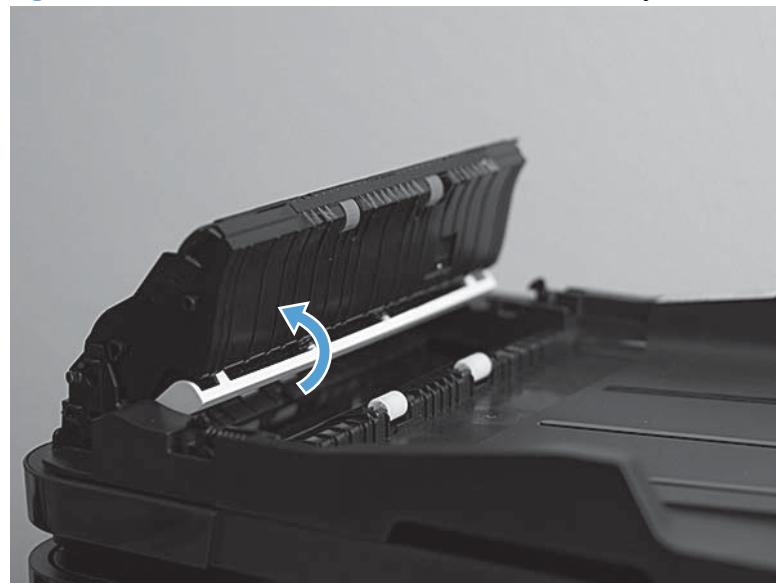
Remove the document feeder core assembly (2 of 5)
